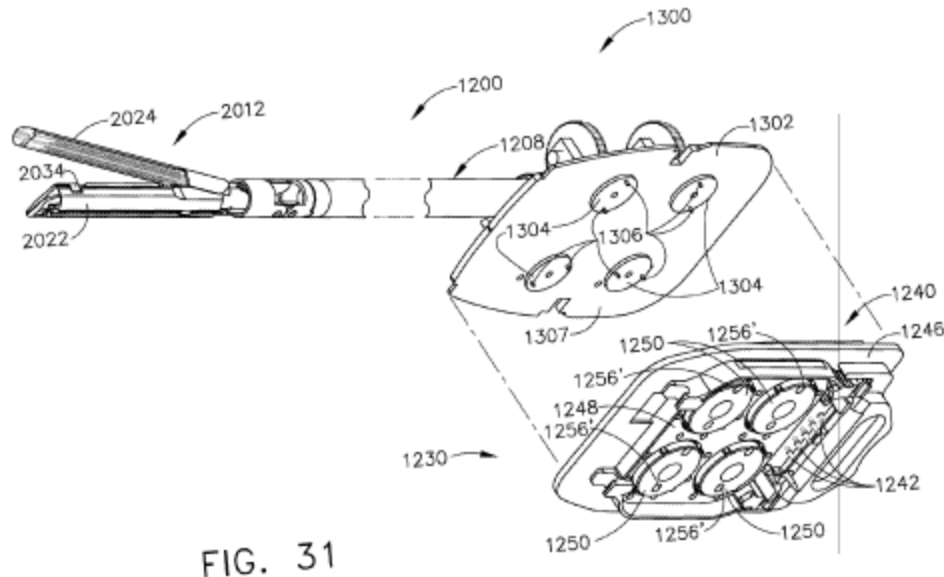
depicts “a partial bottom perspective view of the surgical tool embodiment of FIG. 26.” Ex. 1001, 5:27–28. Figure 31 illustrates “tool mounting portion 1300 includes a tool mounting plate 1302 that operably supports a plurality of (four are shown in FIG. 31) rotatable body portions, driven discs or elements 1304, that each include a pair of pins 1306 that extend from a surface of the driven element 1304.” Ex. 1001, 25:11–16. Figure 31 further depicts that “[i]nterface 1230 includes an adaptor portion 1240 that is configured to mountingly engage the mounting plate 1302.” Ex. 25:19–22. The '969 patent describes that “adaptor portion 1240 generally includes a tool side 1244 and a holder side 1246.” Ex. 1001, 25:30–31.
